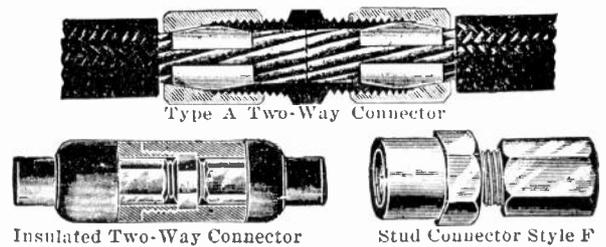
Several other types of solderless connectors, showing a sectional view of the upper one which illustrates the method in which it grips the cable.
